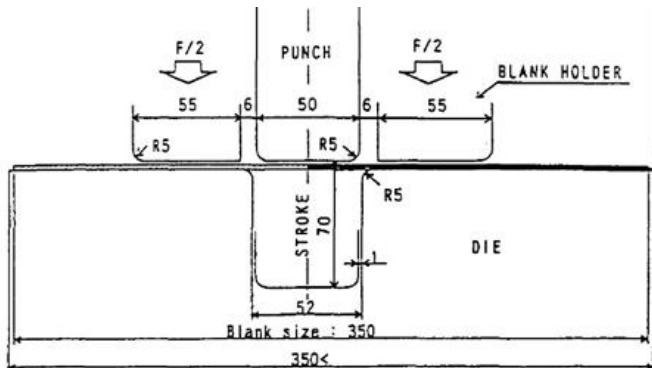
Planar view of deep-drawing manufacturing process showing punch, blank, blank holder, and die components [1]. Units are in mm.
